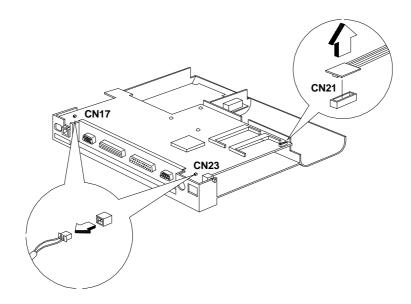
Unplugging the Speaker Connectors and Battery Pack Connector
